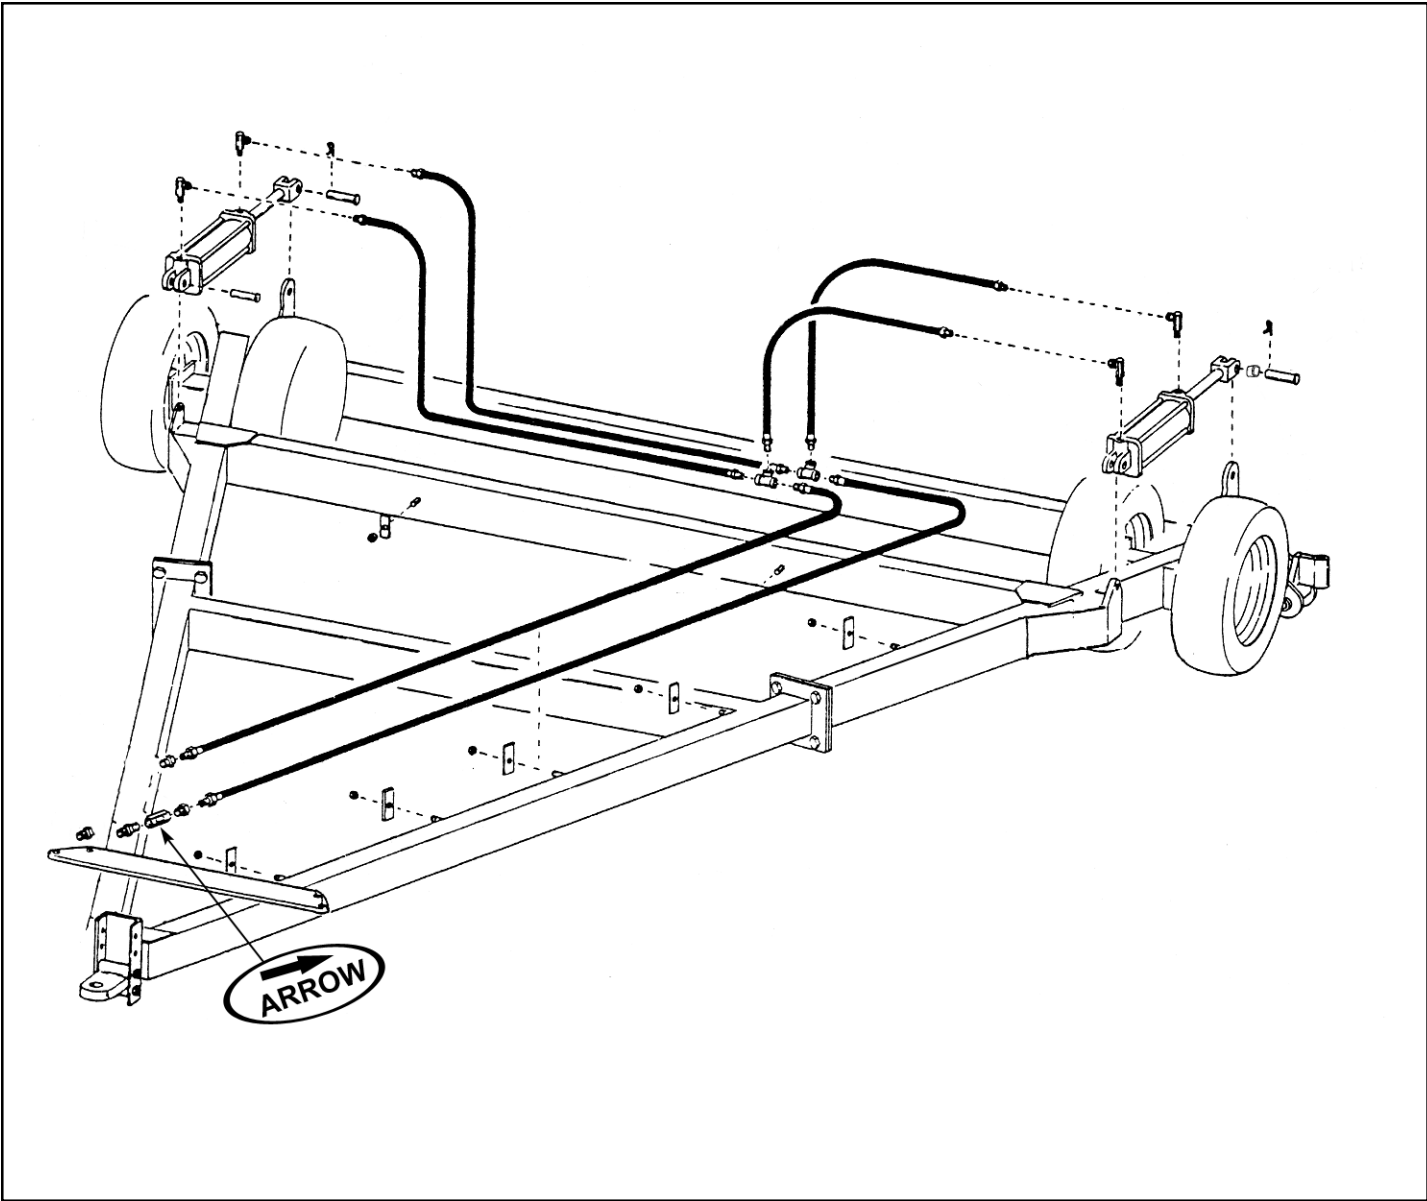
Hydraulic Lift System - 20 ft. Hitch
